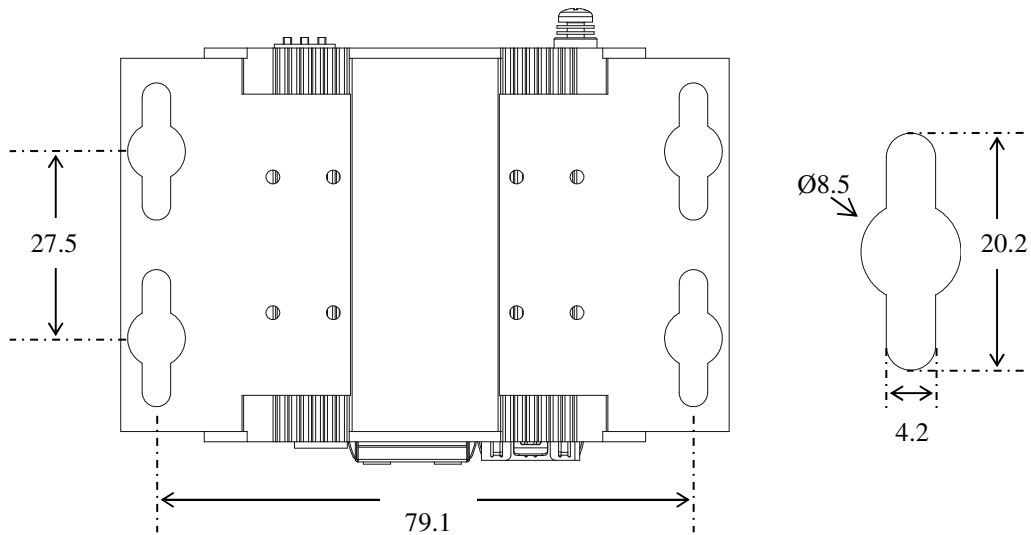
OSD2054P MOUNTING DIMENSIONS
